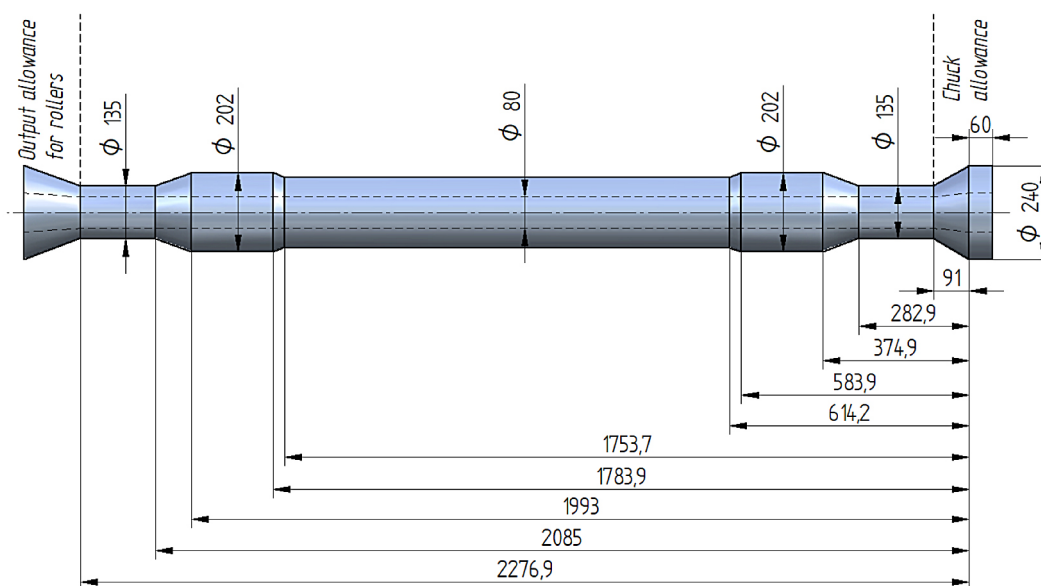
Forging of a hollow axle with technological allowances, necessary for the process of skew rolling with a mandrel
